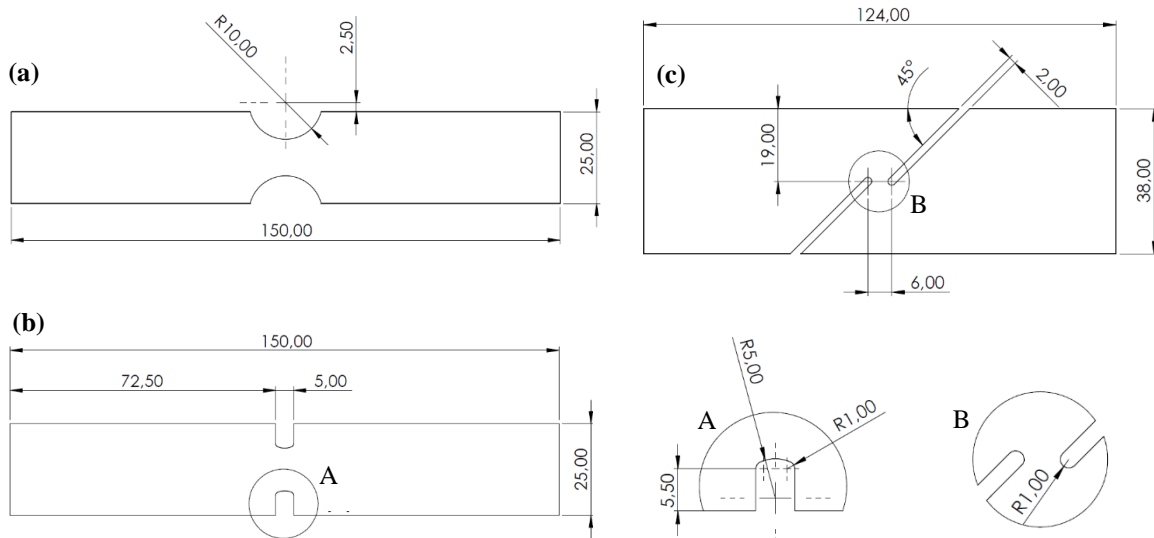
Dimensions of the formability test specimens: (a) Notched Tension specimen, (b) Plane Strain tension specimen and (c) Shear Tension specimen. Dimensions in mm.
